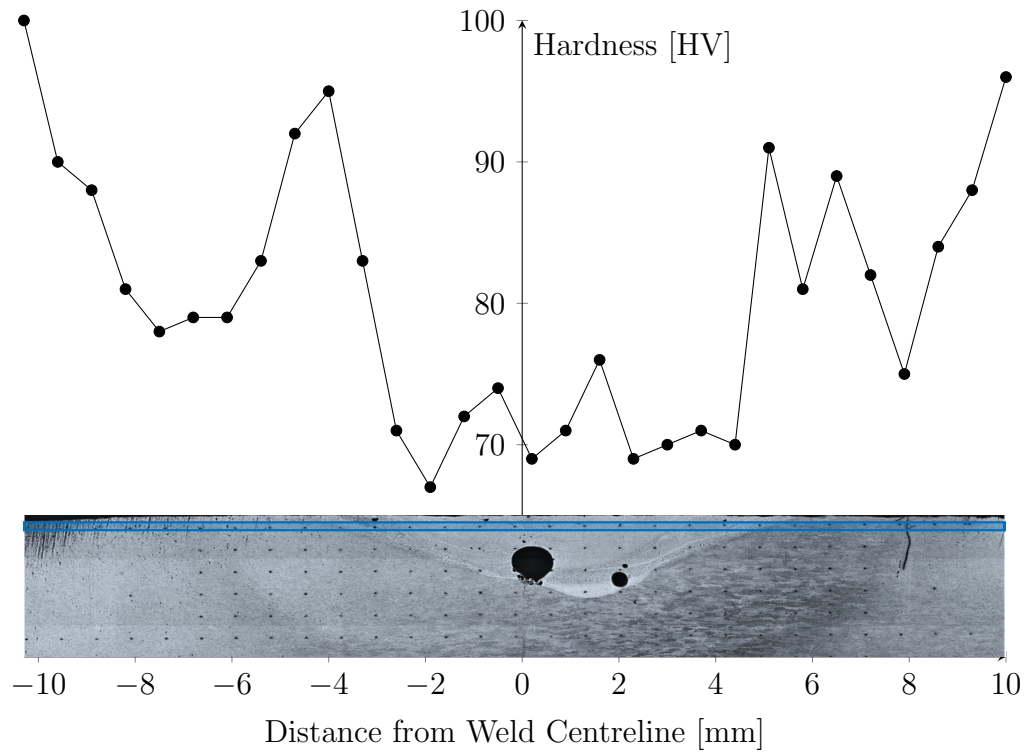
Hardness along the heat affected zone and the weld of the 1040A sample. The measurements were taken along the highlighted region. Note that the weld is skewed to one side, but the $x = 0$ location was defined by the groove centreline.
